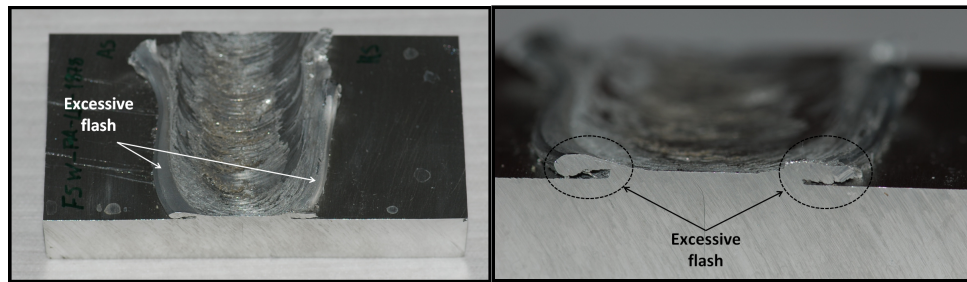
Friction stir weld presenting excessive flash (HZG).
